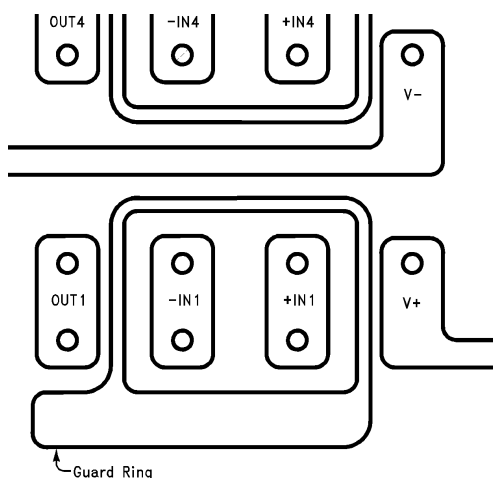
Example of Guard Ring in P.C. Board Layout (Using the LMC6024)
